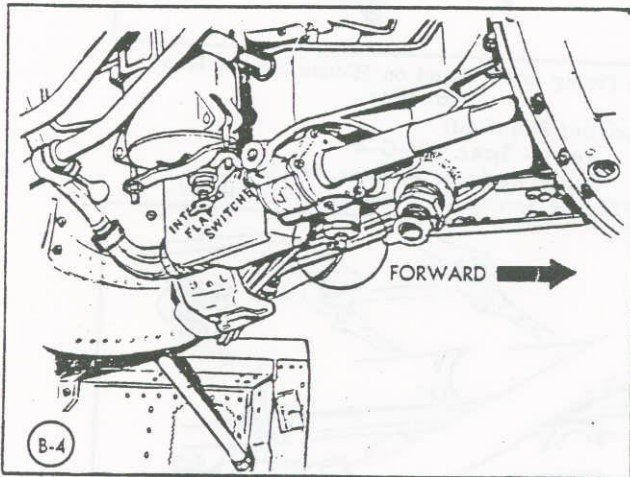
(Sheet 2 of 6 Sheets) — Lubrication Diagram
